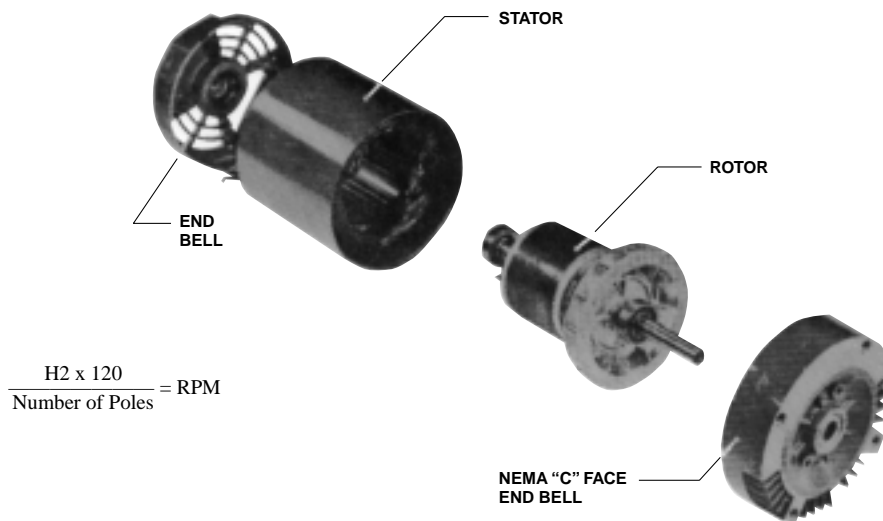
, Exploded View, AC C-Face-Mounted Motor
